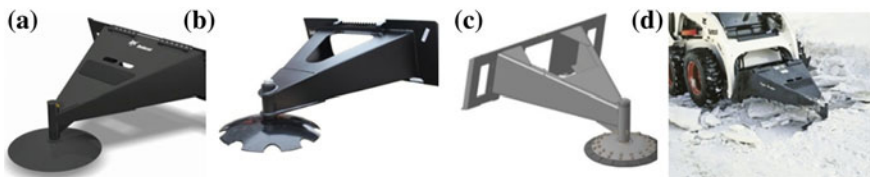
Mounted disc ice-cutting equipment: a Bobcat scraper (disc working member); b Bobcat scraper (disc tool with cut-outs); c the scraper (disc working body with replaceable cutters); and d equipment mounted on Bobcat
